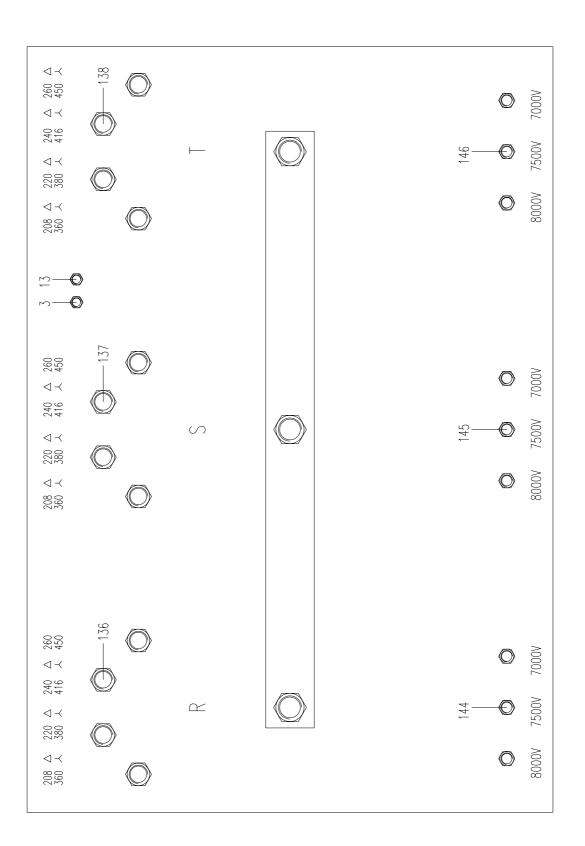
SECTIONAL VIEW OF THE POWER SUPPLY P1
